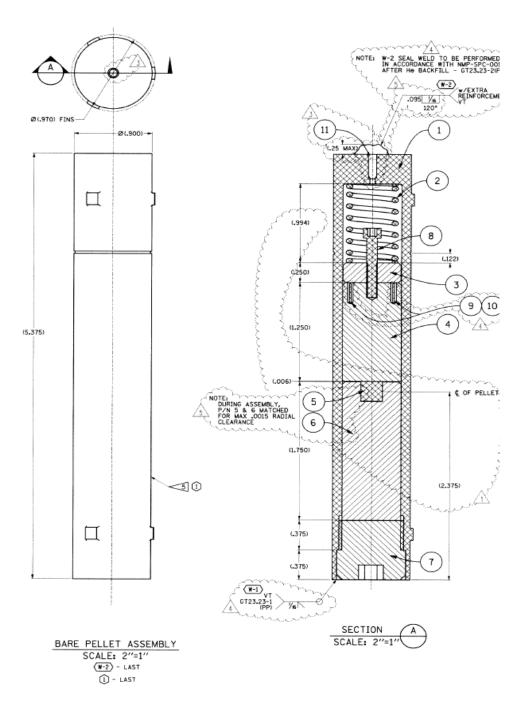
Robust single pellet capsule for initial testing. Item 5 is the pellet, 6 is the aluminum mount, and 4 is the copper heat sink.
